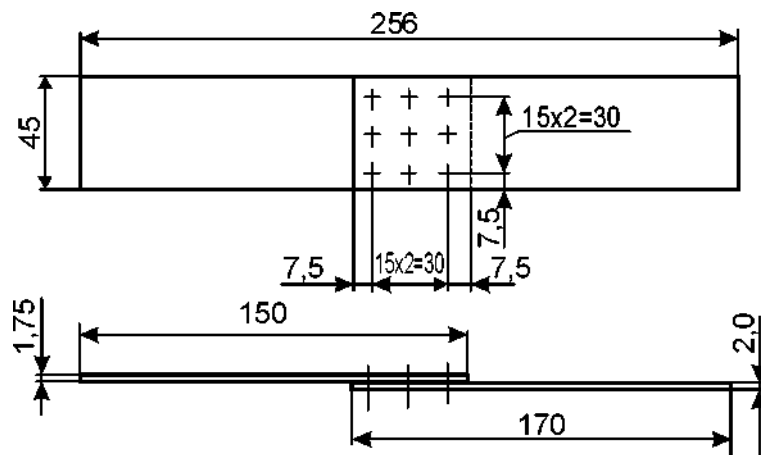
Specimen of three-row overlapped riveted joint made of Д16чАТЛ2 sheet
